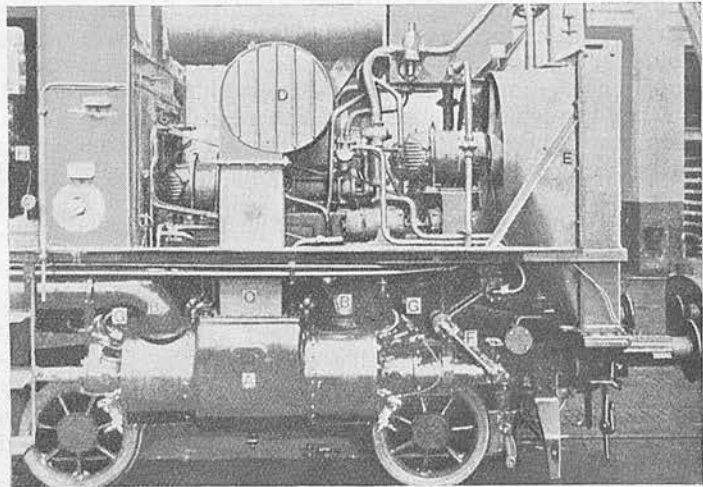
Humboldt-Deutz locomotive—details of power unit.
